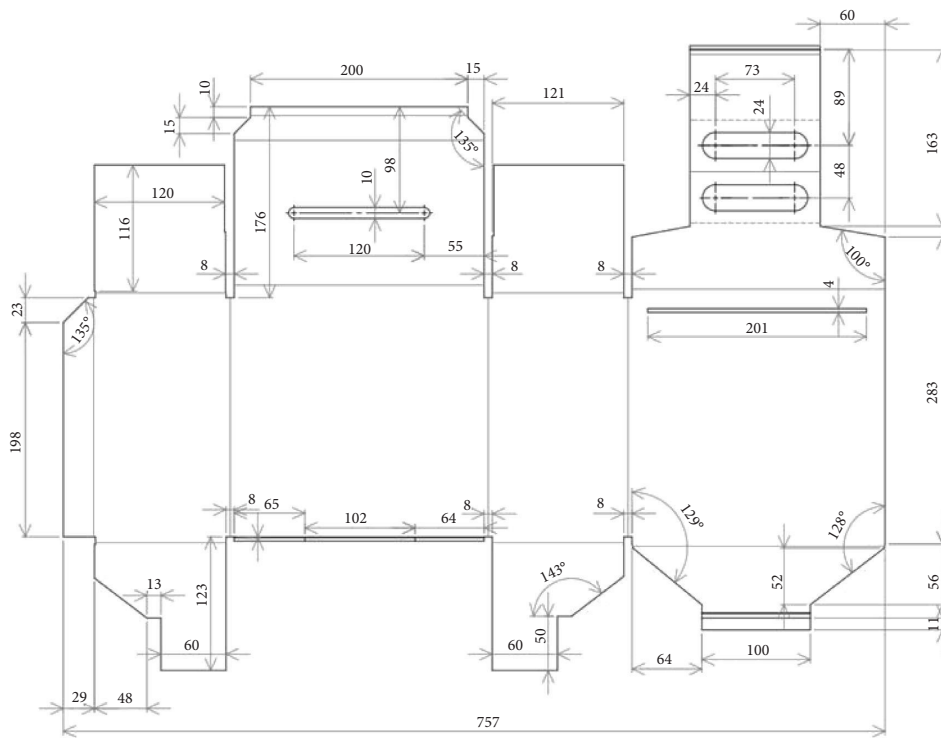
Packaging corrugated paperboard dimensions (units in mm).
